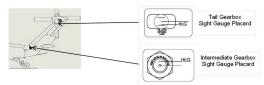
HLG Gearbox Sight Gauge Placards
